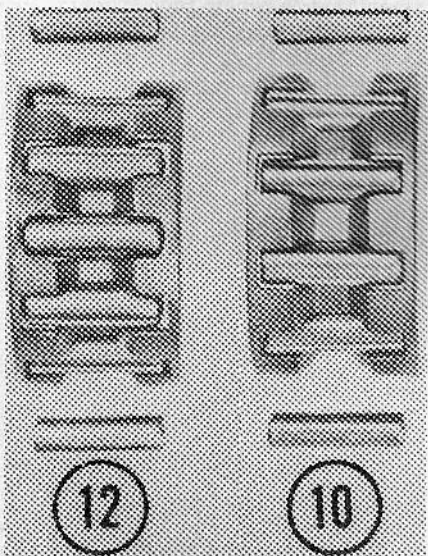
View of the 12 and 10 roller crankpin bearings used on 4.7 cubic inch engines. The bearing with eight captive rollers and two loose rollers should be installed.
